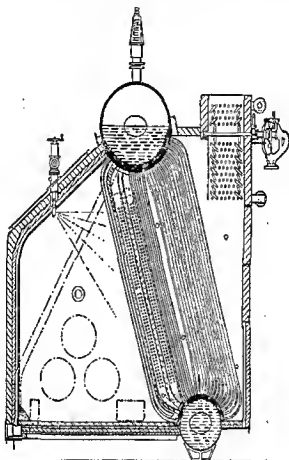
Babcock and Wilcox two-drum bent-tube boiler with inclined tube bank.
